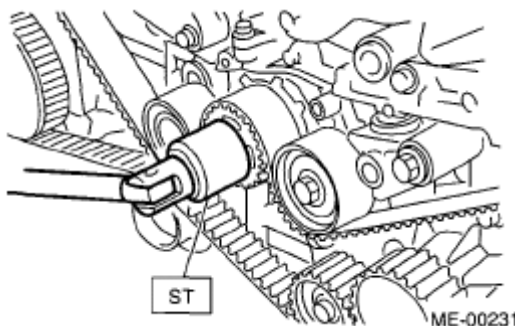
Turning Crankshaft Using ST (499987500) Crankshaft Socket
